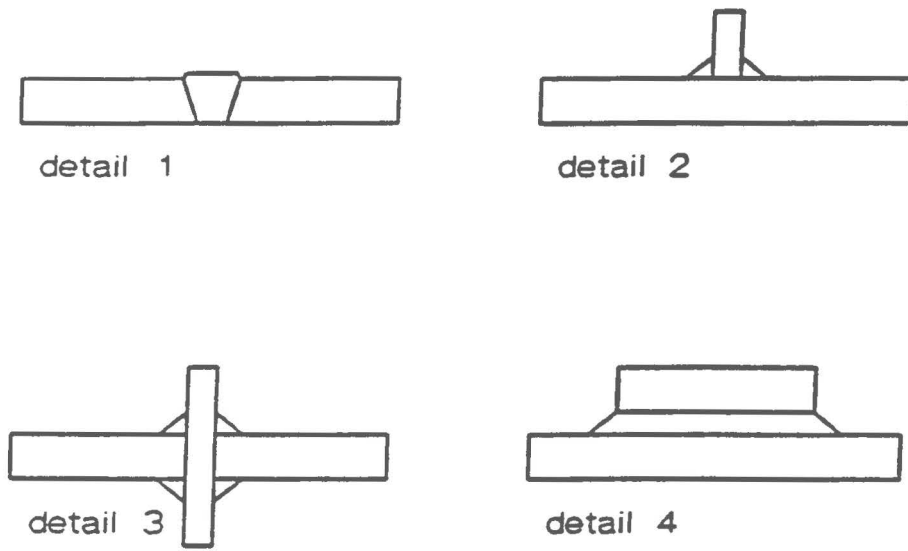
Welded joint details investigated (S-N tests)
